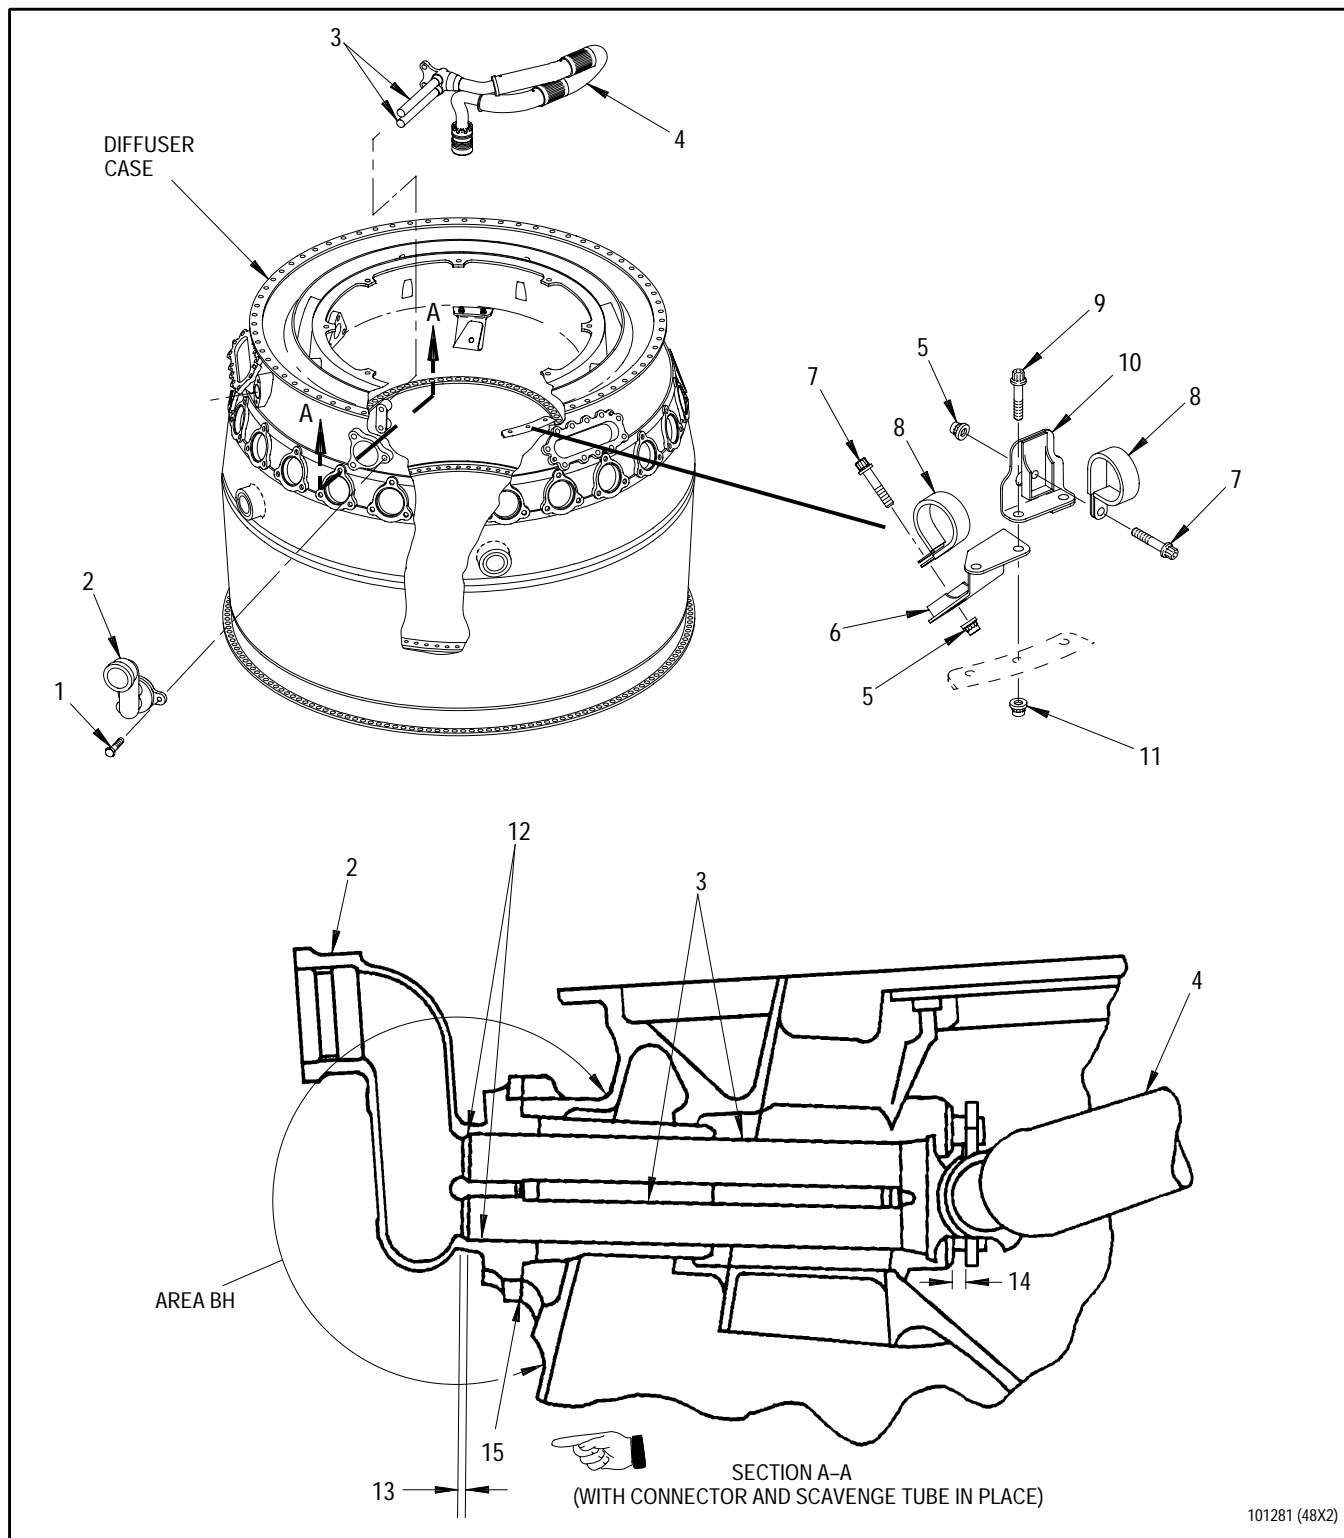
No. 4 Bearing Connector/No. 4 Bearing Left Internal Scavenge Tube Assembly - Disassembly and Assembly
